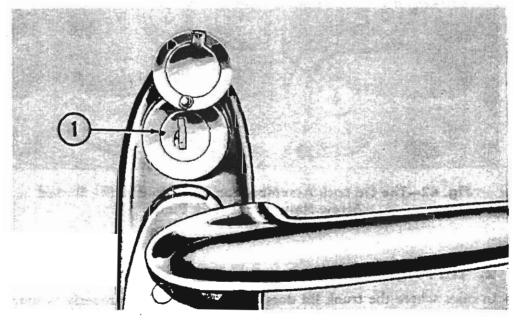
The Cylinder Retaining Pin Hole Should be to the Left of the Key Hole.
